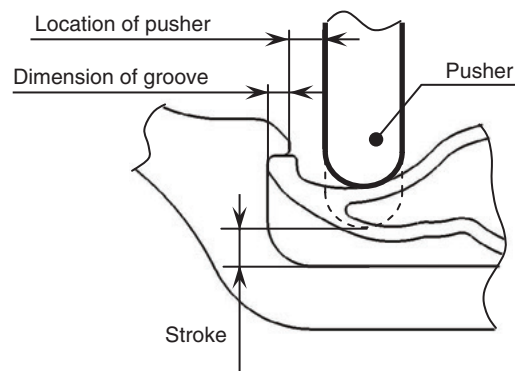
Groove shape, pusher location and stroke optimization of resonator and wheel assembly machine
